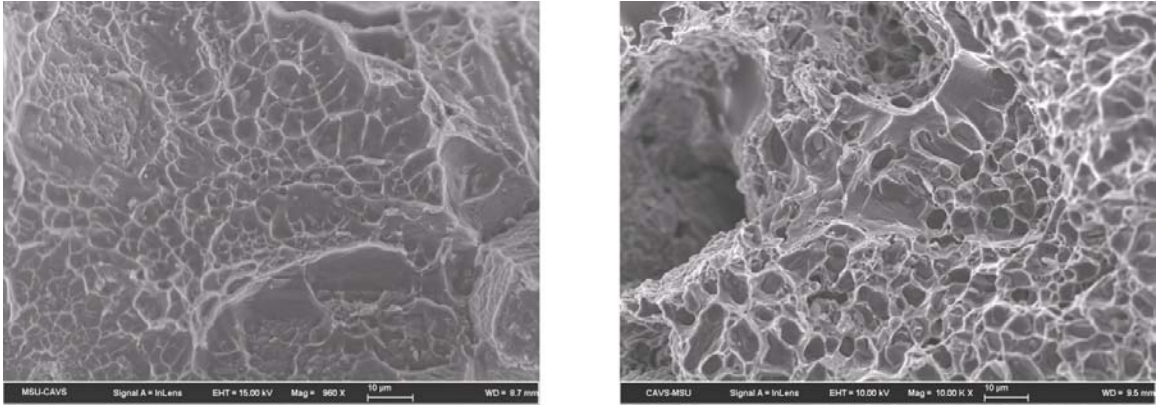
Fracture surfaces of A356-T6 aluminum alloy under tension at two different applied strain rates (a) 0.0001/s on the left and (b) ~1000/s on the right.
